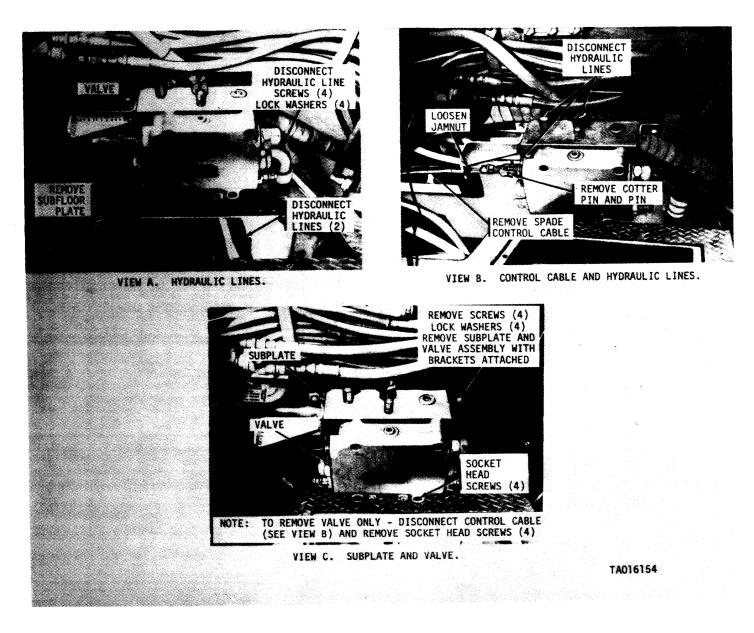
Spade subplate and control valve assembly-removal and installation.
